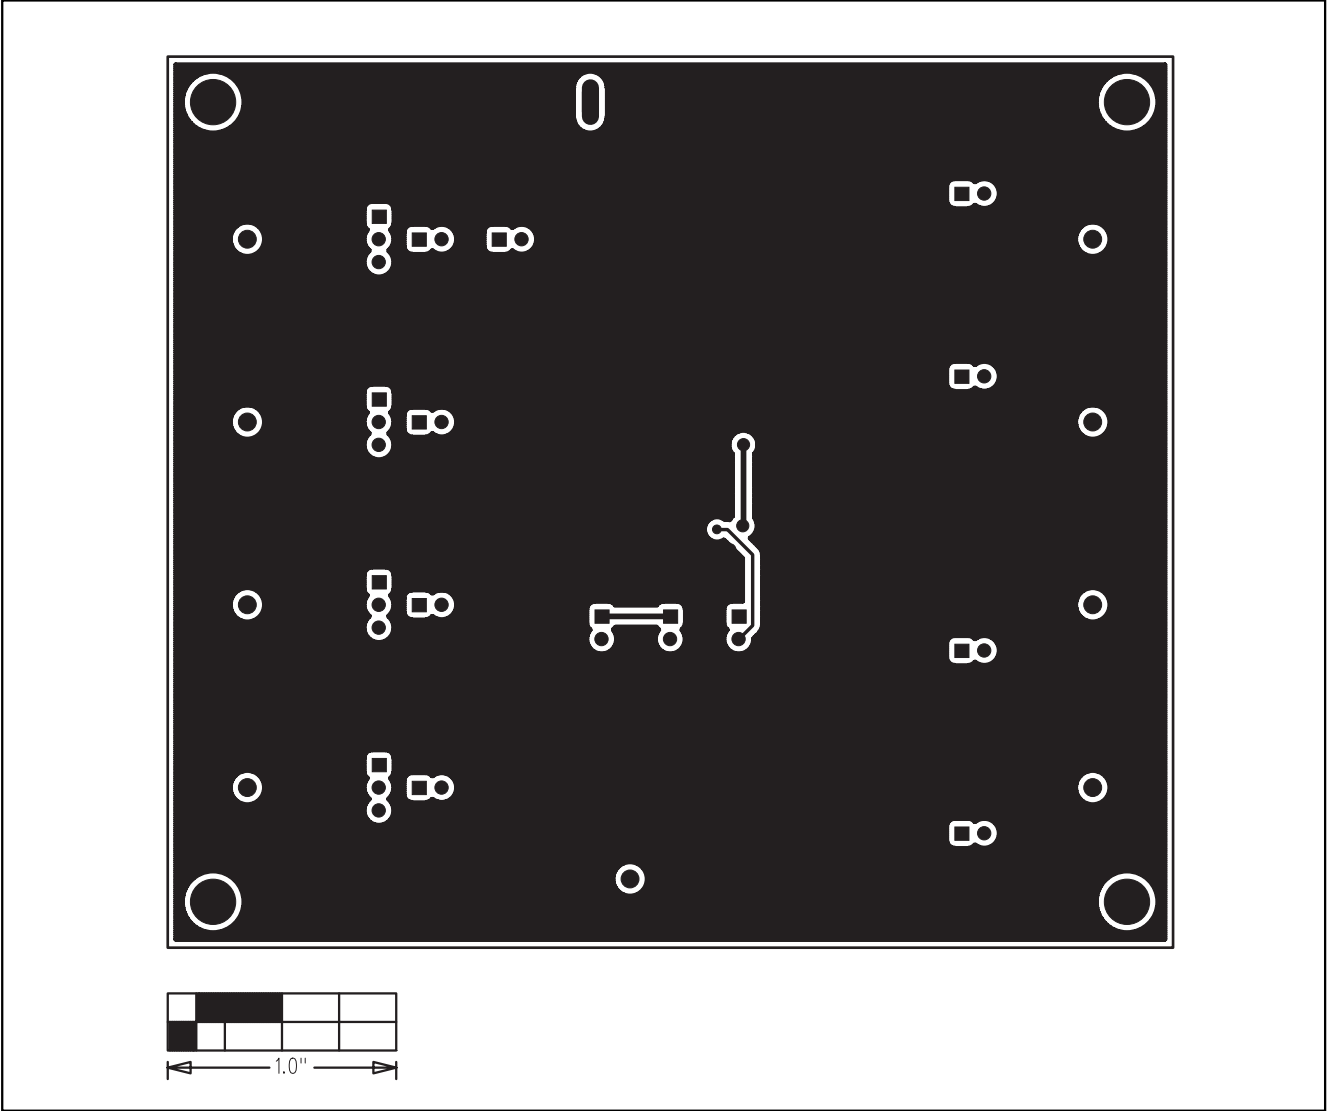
MAX7445 EV Kit PC Board Layout—Solder Side
